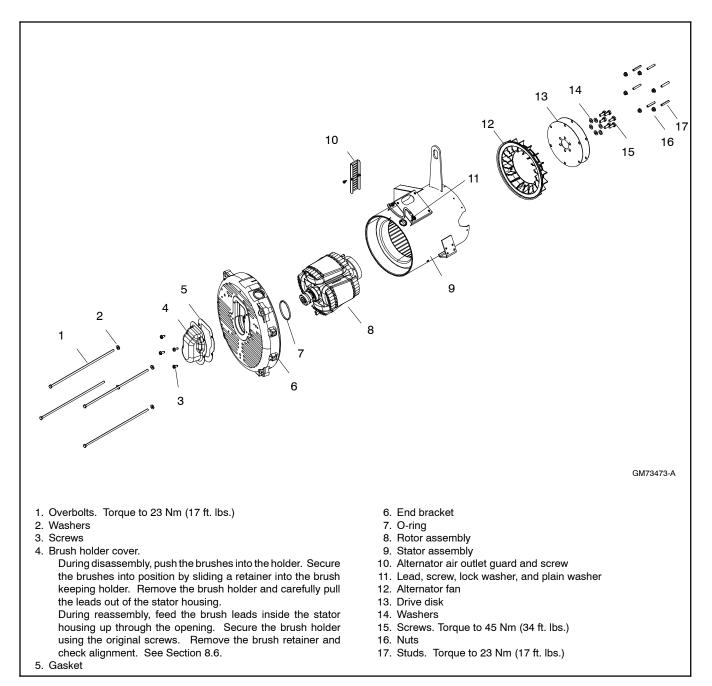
6EKOD/5EFKOD Alternator Assembly (Disassembly/Reassembly)
